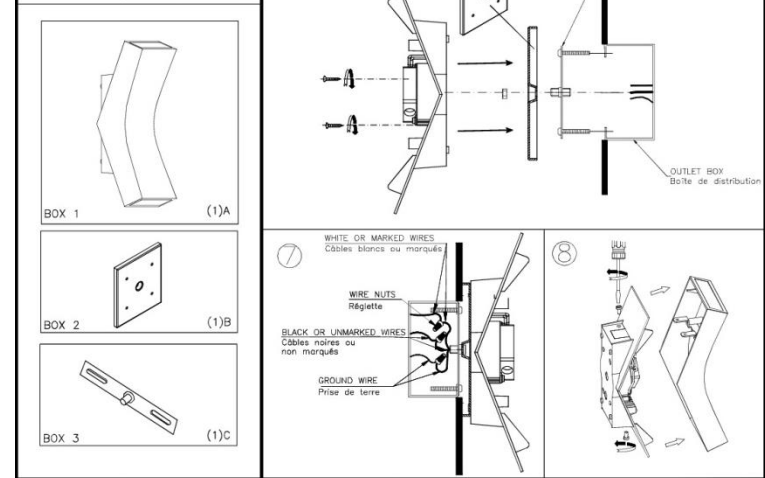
UNPACK THE FIXTURE. CHECK THE CONTENTS OF THE BOX. YOU SHOULD RECEIVE:
